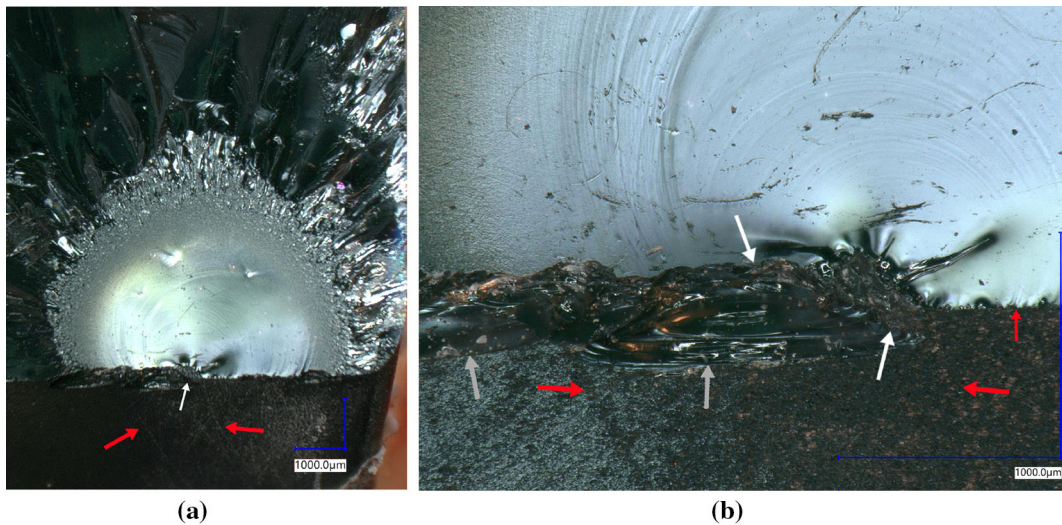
Microscope images of the bottom and fracture surface of a “FT Float 1120 °C” specimen, showing the fracture origin (Fig. 38b is a magnification of the fracture origin). The cause of failure is a combination of grinding scratches (red arrows) acting upon a surface infold with crystalline inclusions (white arrows).
